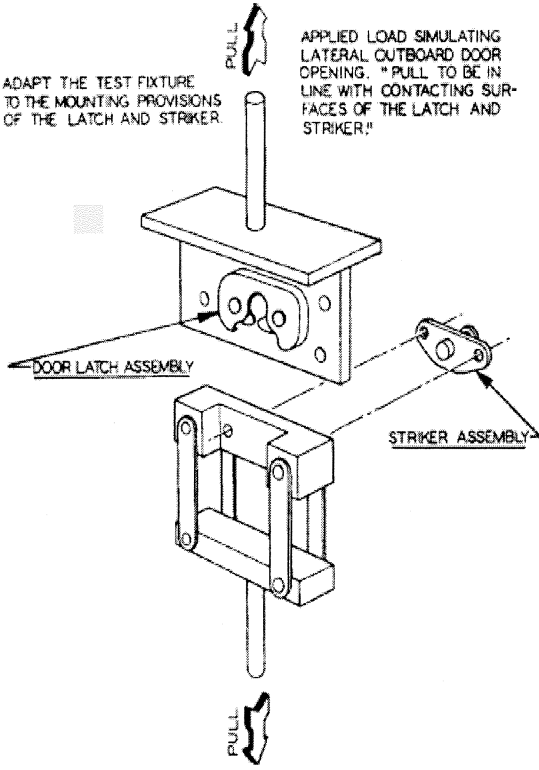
Door Latch – Tensile Testing Fixture for Load Test 2
